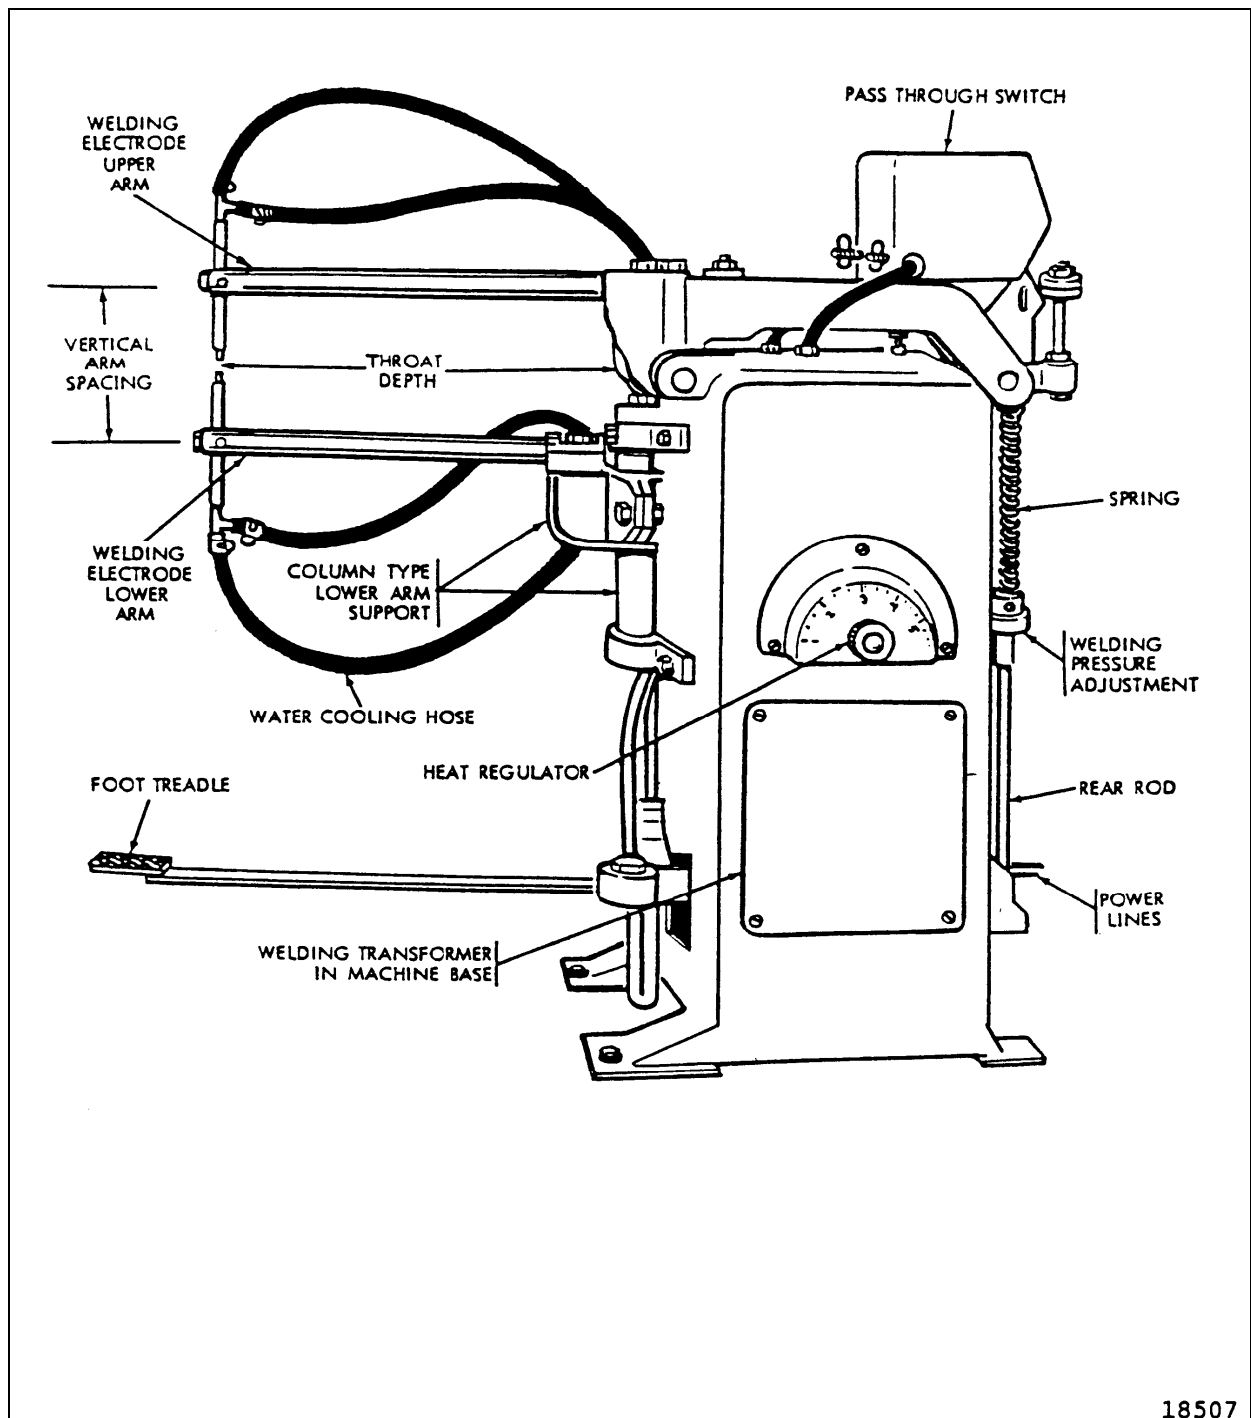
Resistance Spot Welding Machine and Accessories
